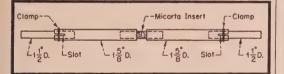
The assembly of the driven element when a split element is used. Micarta or dried oak will provide good insulation while still making for mechanical rigidity.
